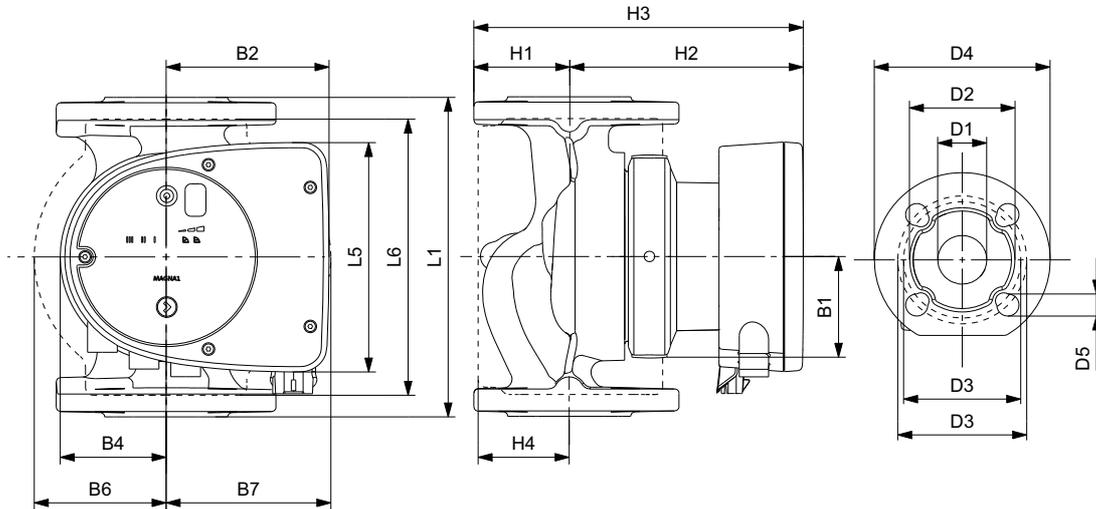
Single-head pump dimensions, plug-connected versions, flanged version
